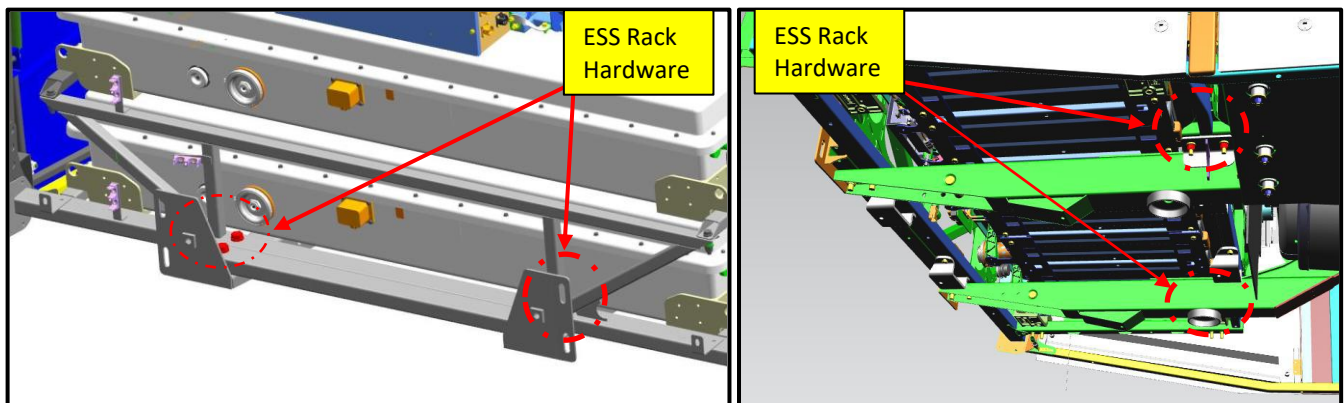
ESS Pack Assembly Mounting Hardware Location Reference
